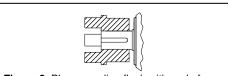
Place coupling flush with end of motor shaft and tighten setscrew.
